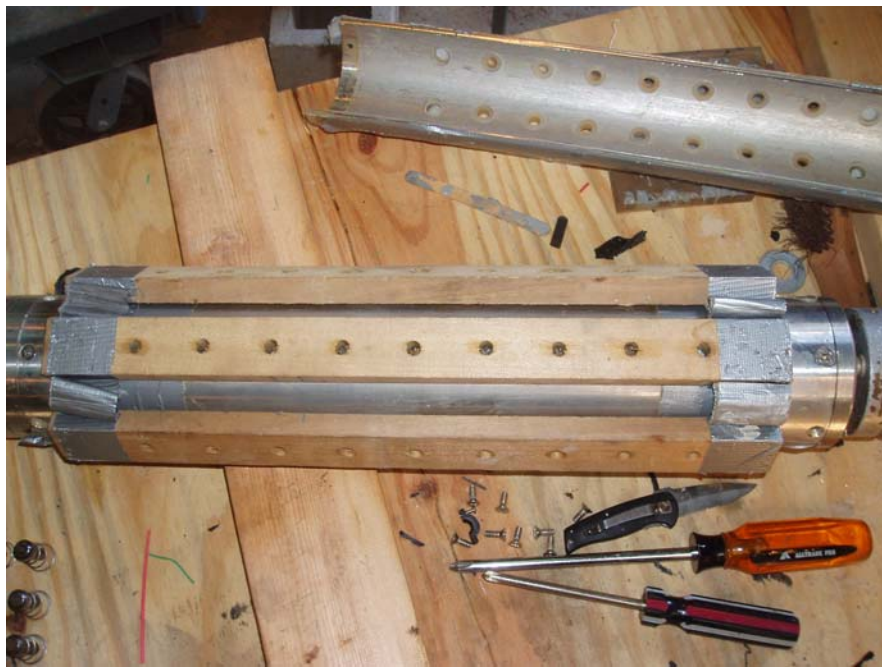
Photos Showing Wooden Template Used to Aid in Reassembling Device.
